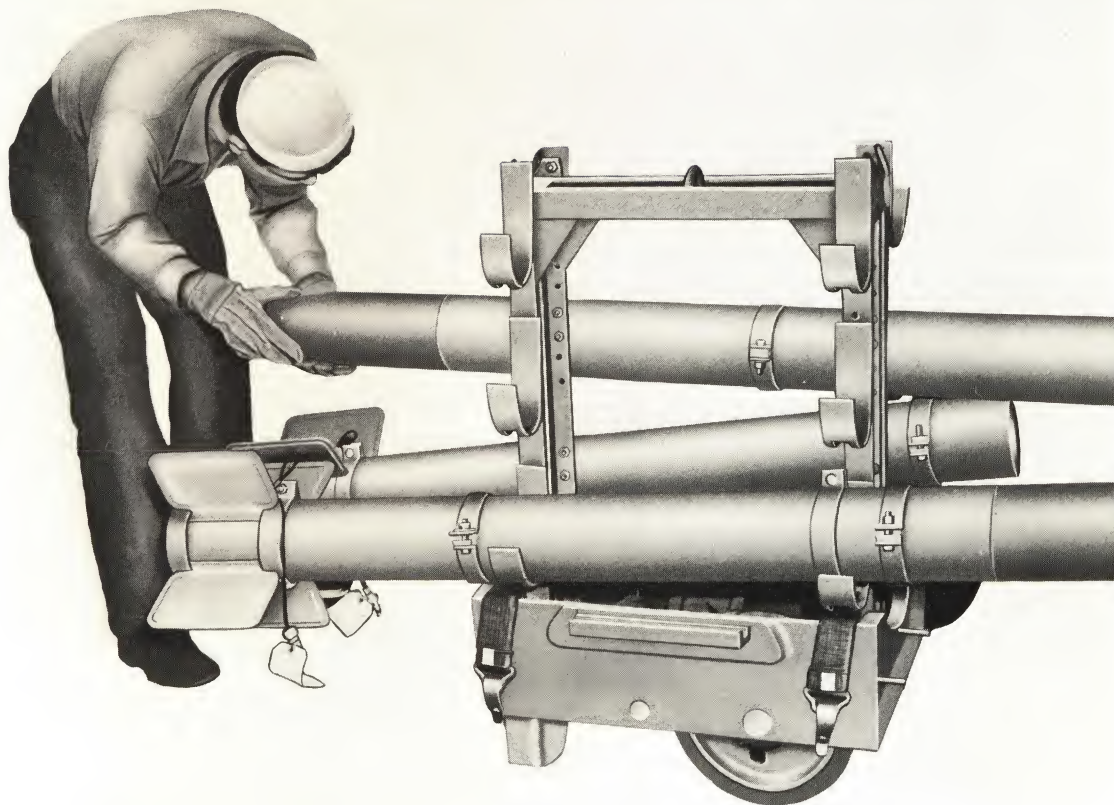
Installing Head, with Motor in Stirrups of Bomb Skid Adapter.
